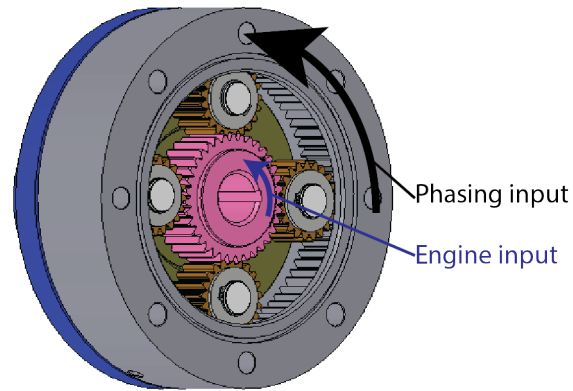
Planetary gearbox with inputs from engine crankshaft to sun gear and servo motor to outer ring gear
